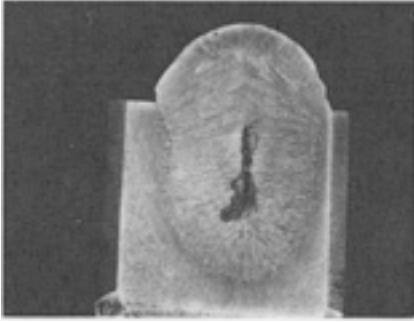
13-mm (0.5-in.) AISI 4340 steel plate, submerged arc weld. Heat input: 1.9 MJ/ m. Macrograph shows solidification (centerline) cracking. Crack position is highlighted by etchant "bleed out." 85 mL H₂O + 15 mL HNO₃ + 5 mL methanol. 1.5×
